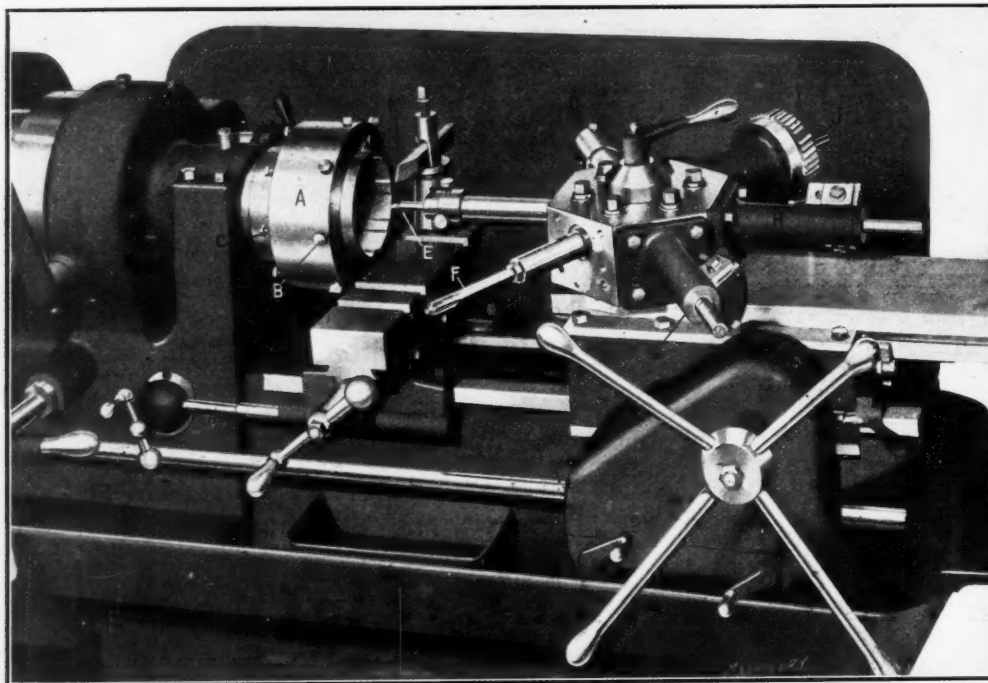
"Set-up" of Tools for Machining a Fan Motor Case in a Turret Lathe built by Bardons & Oliver, Cleveland
